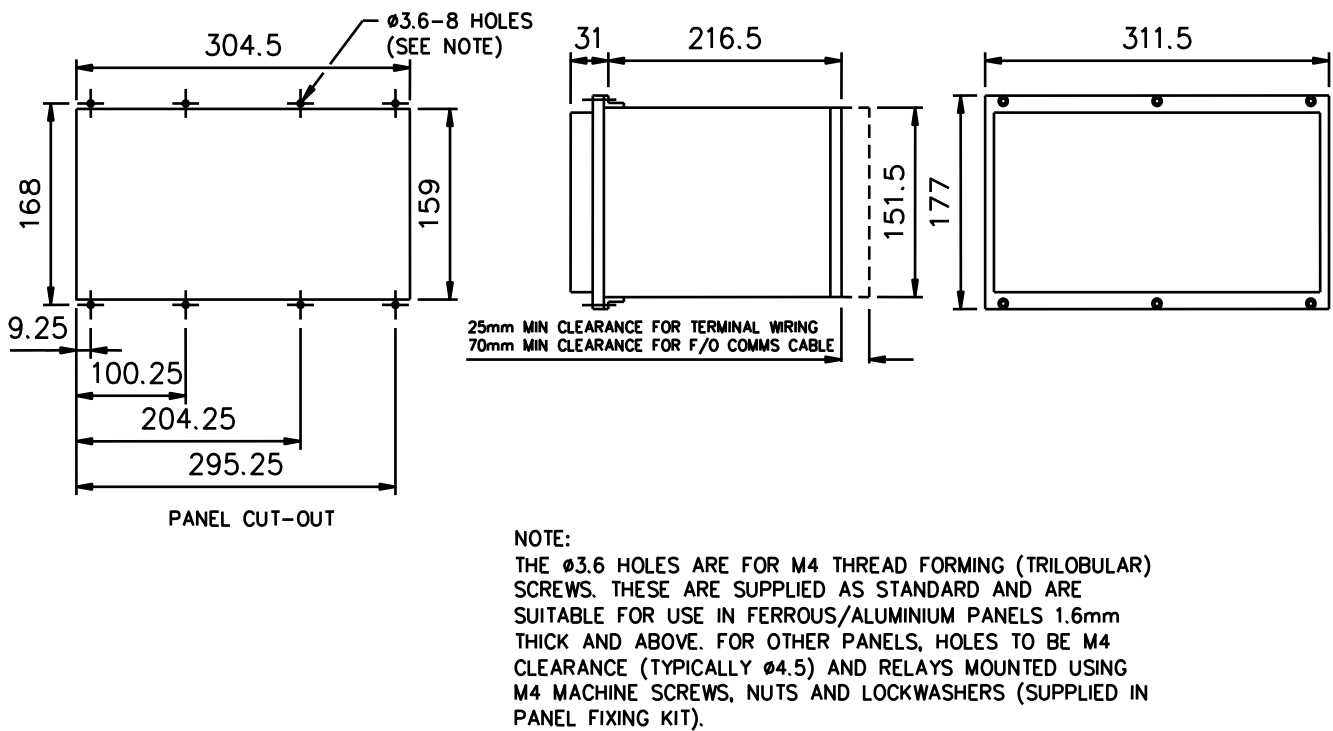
Overall Dimensions and panel drilling for Epsilon E12 case
